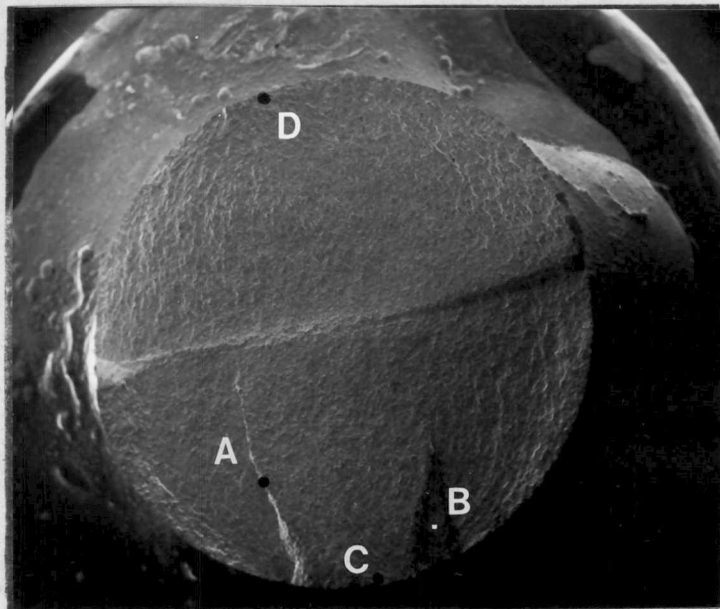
Macroscopic appearance of a non-decarburized fatigue specimen tested at 87.1 ksi (600 MPa) (129% of the Y.P. and 87% of the U.T.S.) in bending. The specimen failed after 5.53×10^4 cycles. Points A and B are ratchet marks and point C and D are crack initiation sites. SEM 12x.
